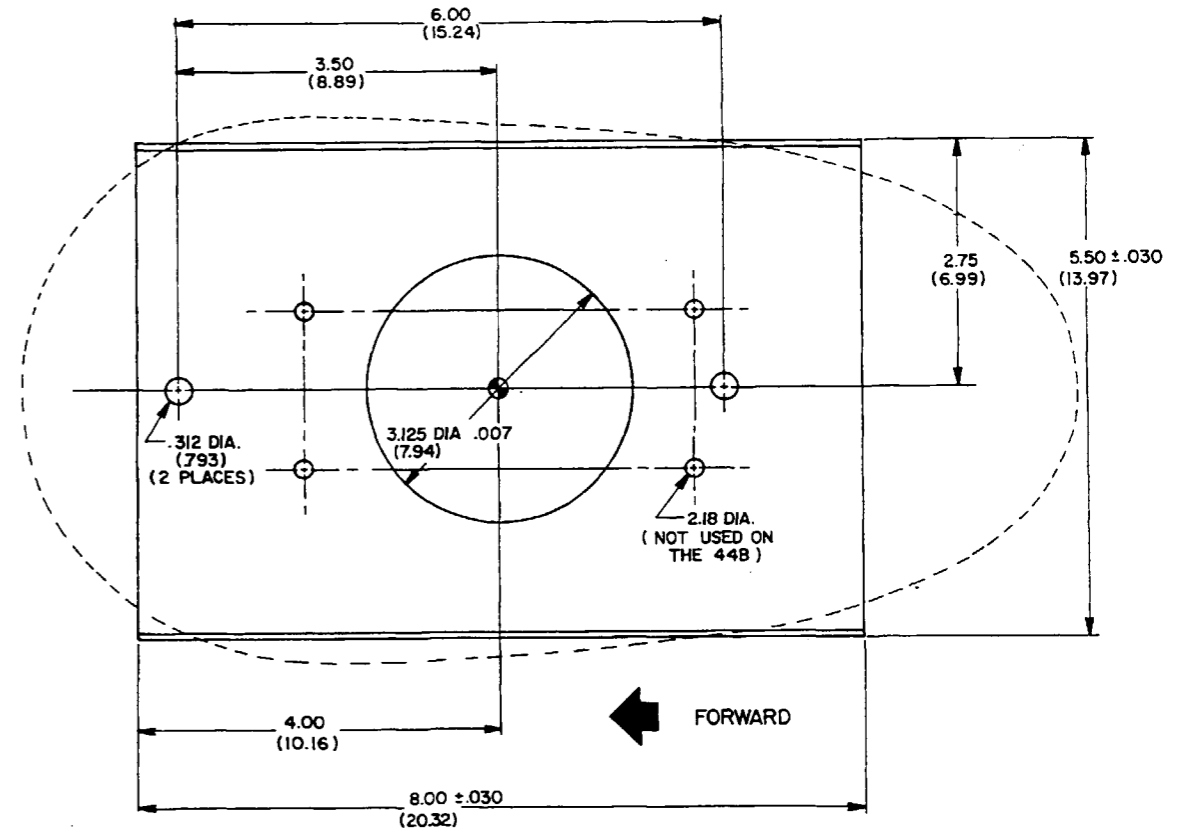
KA 44 OUTLINE AND MOUNTING DRAWING
